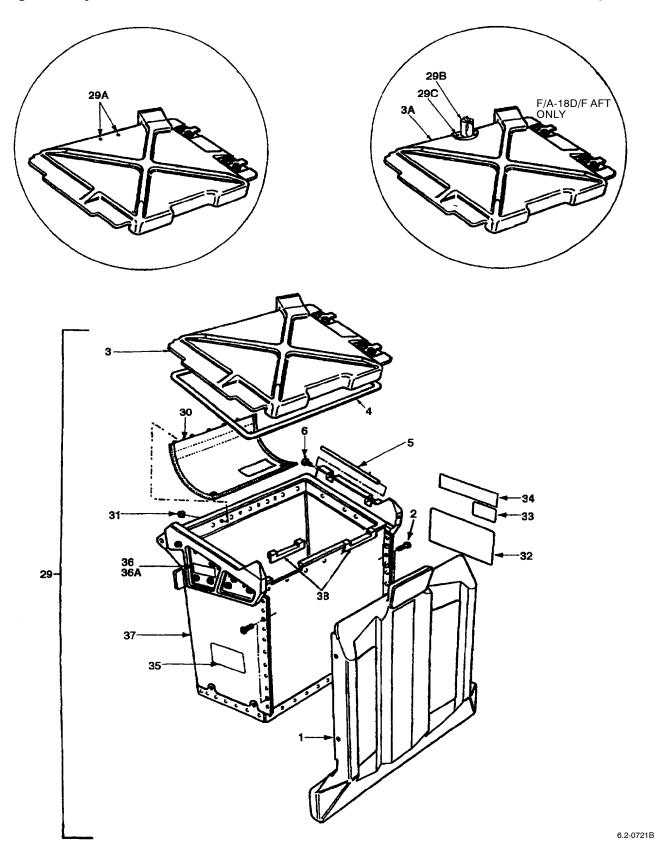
A/P28S-32(V) 1 to 6 Parachute Assembly (Sheet 4 of 6)
